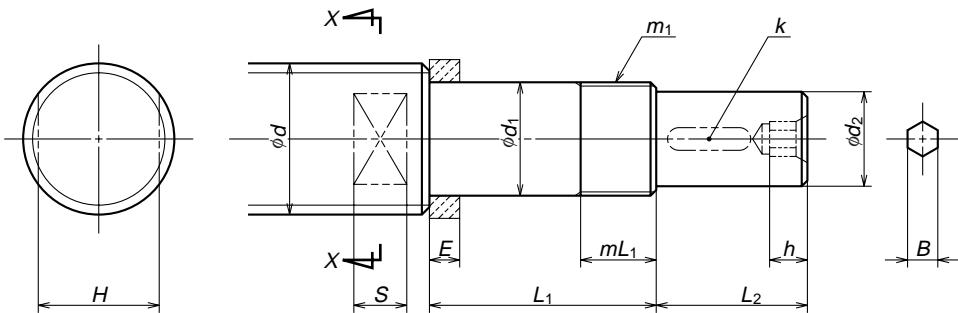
Rolled ball screw shaft end (drive side)
